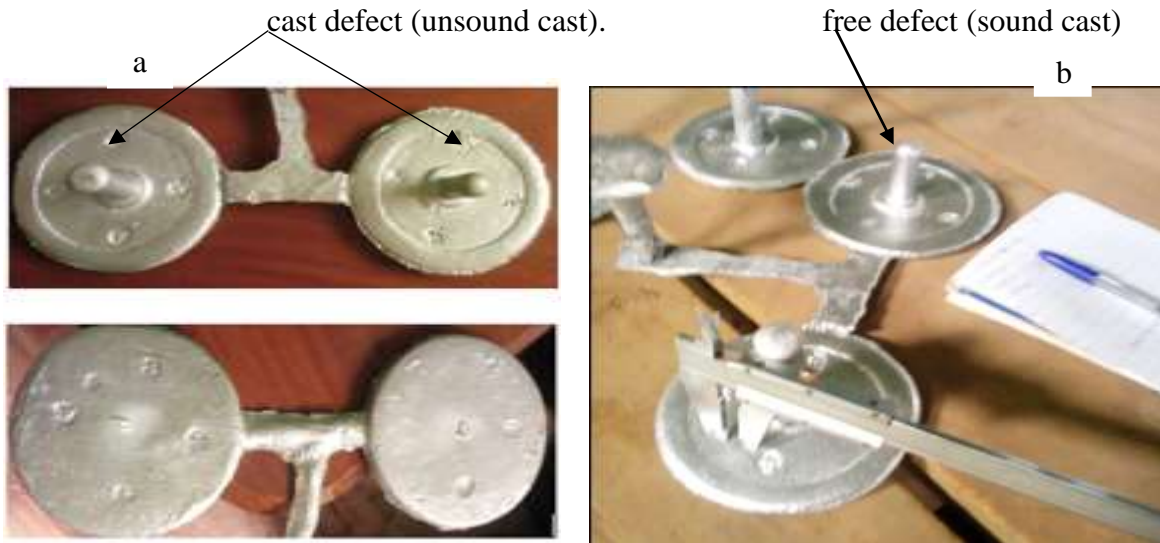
casting show Shrinkage defect and without defect
